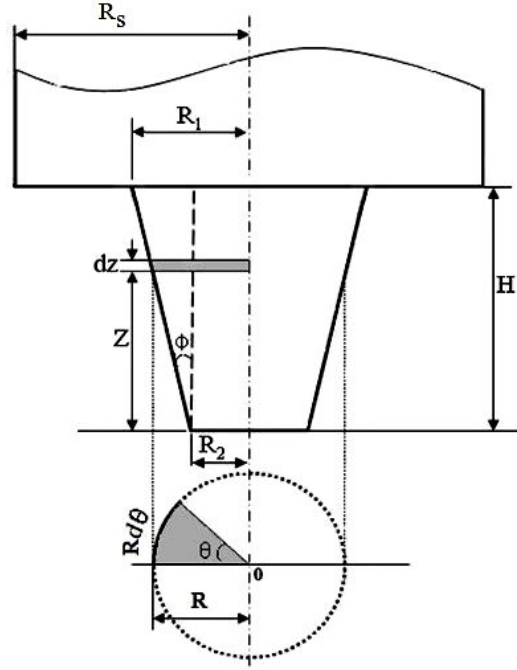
Schematic drawing of tool and infinitesimal segment area at pin surface
